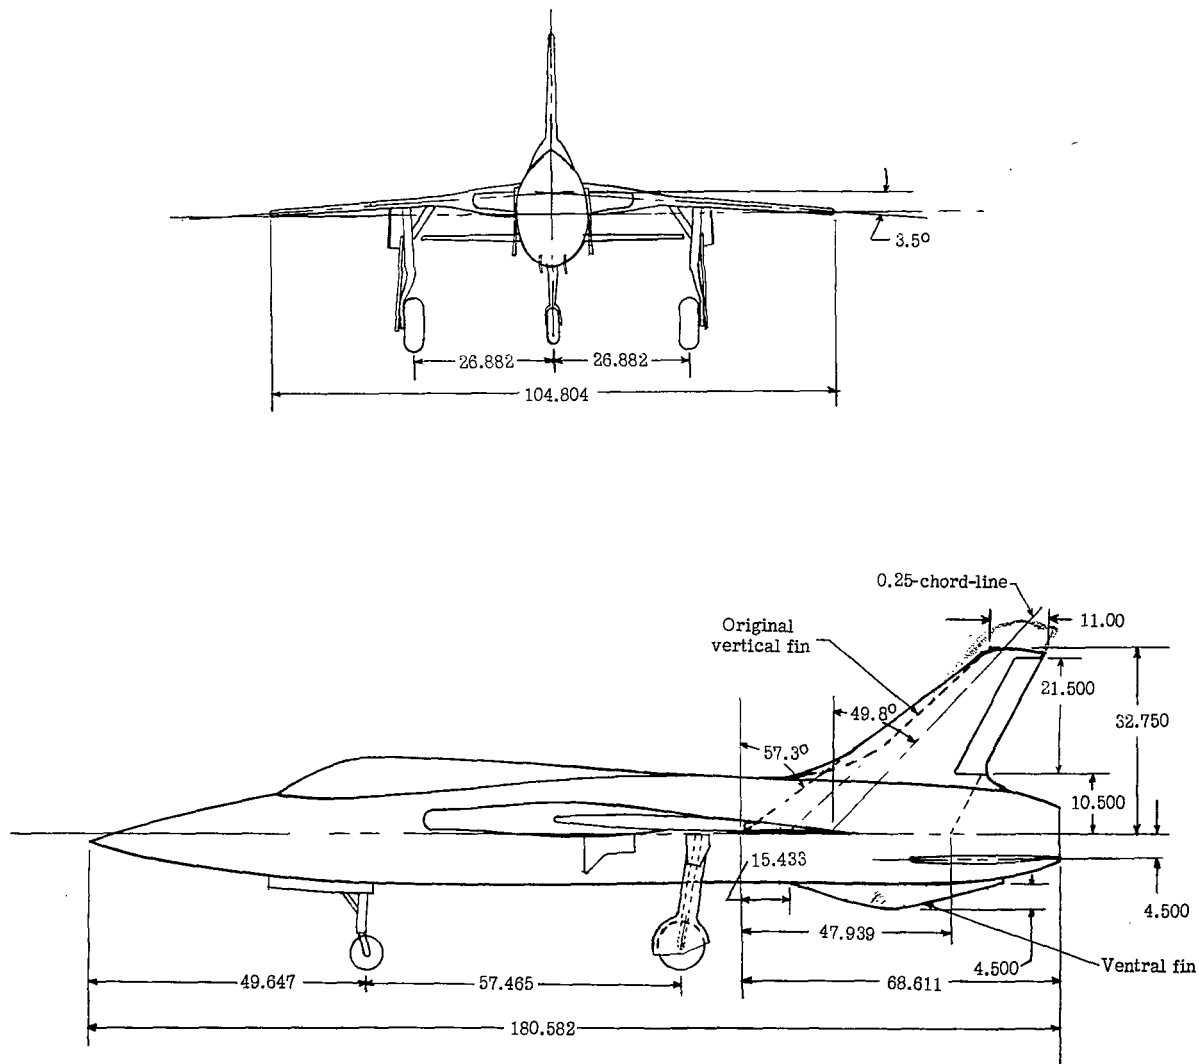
Details of the landing gear, modified vertical tail, and ventral fin. (All dimensions in inches except where noted.)
